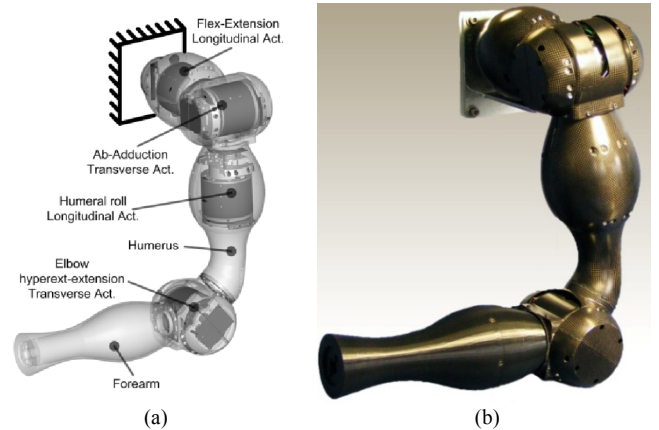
The CompAct™ Arm: (a) external layout semi-transparent CAD view and (b) fully assembled prototype
